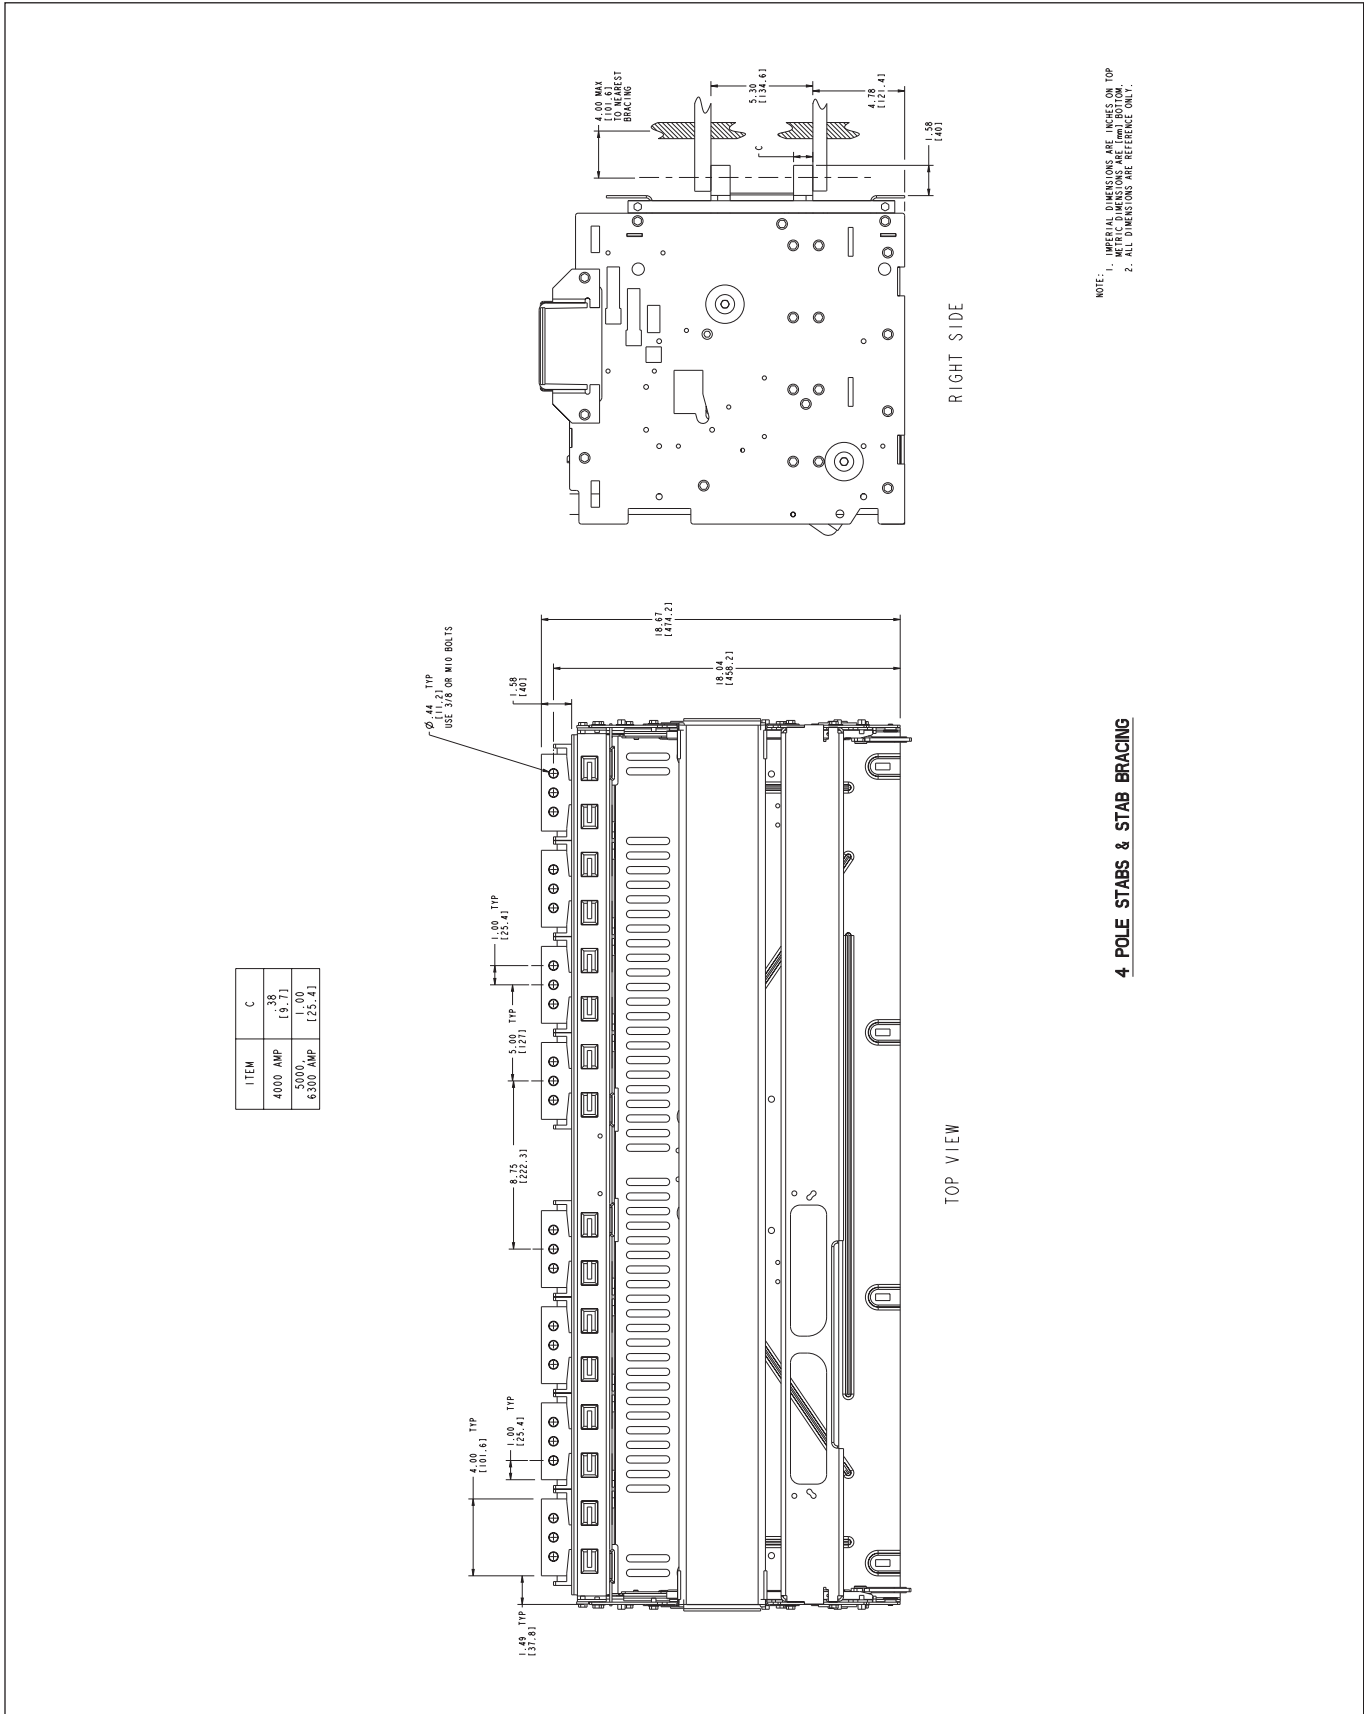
4000-6300A Double-wide frame fixed breaker (Overall dimensions and mounting locations)
